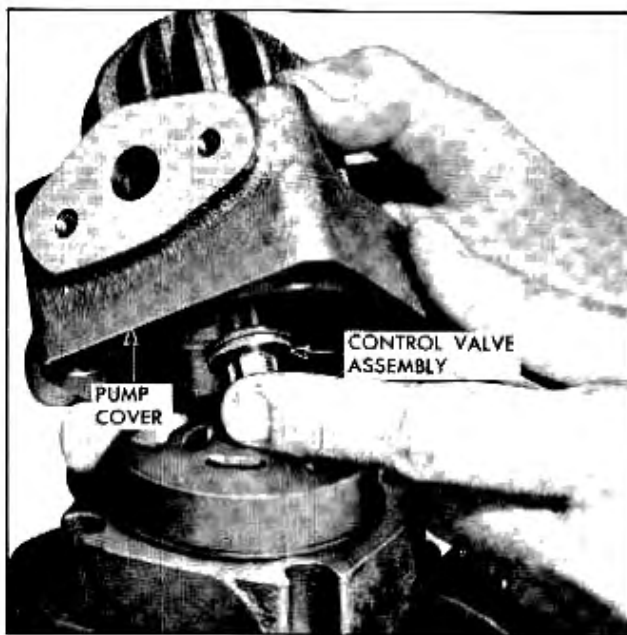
Removing Pump Cover and Control Valve Assembly
